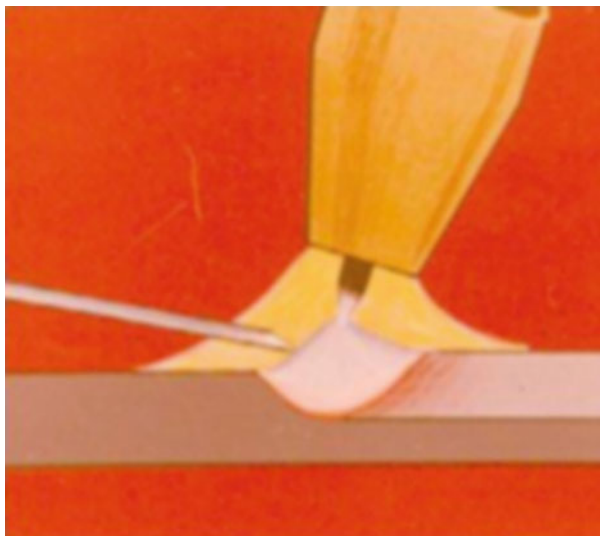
Gas tungsten arc welding- GTAW/TIG
